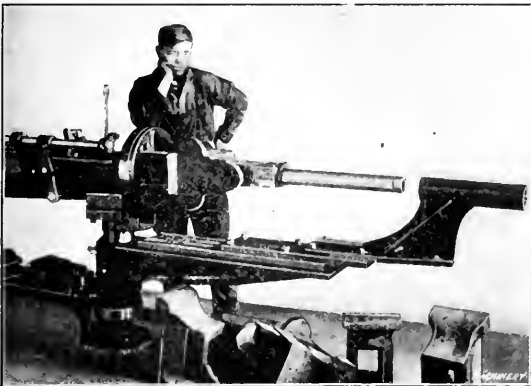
J. N. Lapointe Machine broaching Heavy Vise Body
